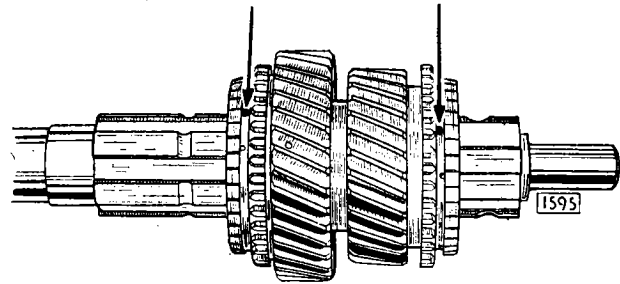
Showing the holes through which the thrust washer locking plungers are depressed
